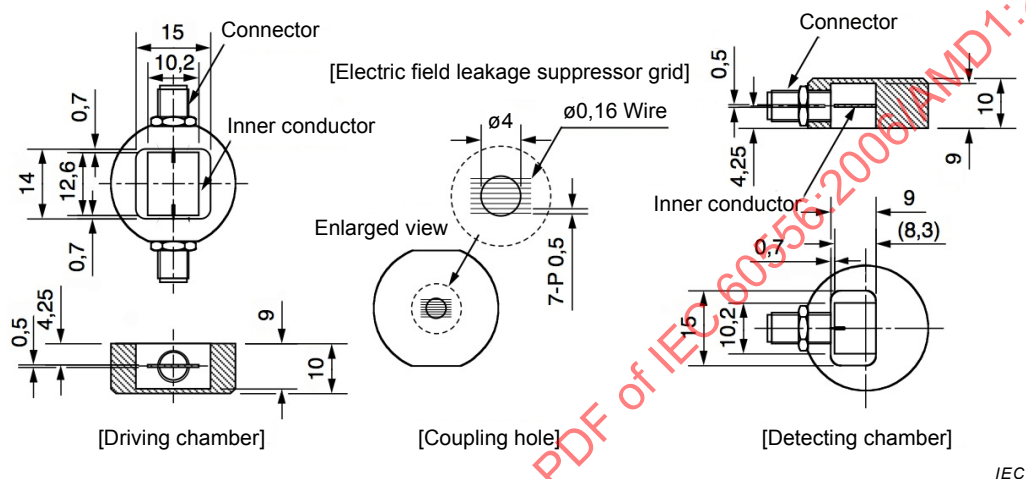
Example of a test fixture (tolerance: Class f)
